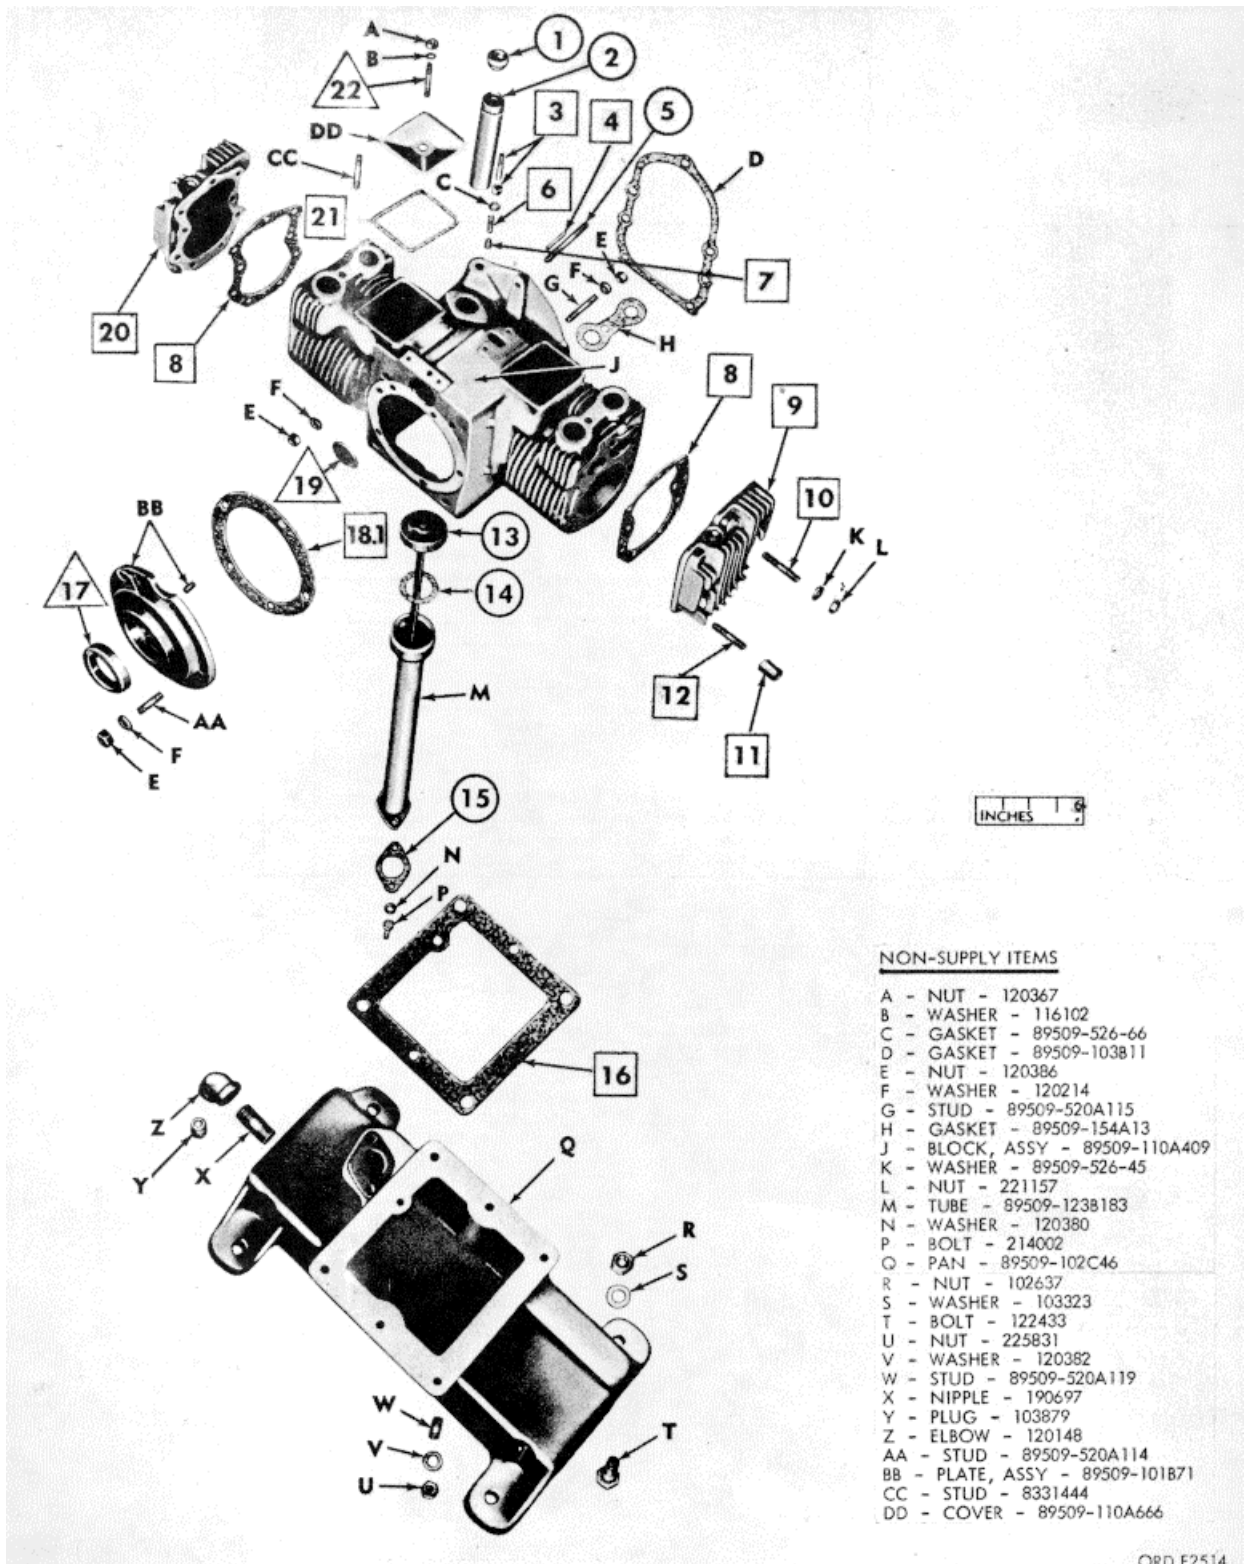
CYLINDER BLOCK, CYLINDER HEAD AND RELATED PARTS.
